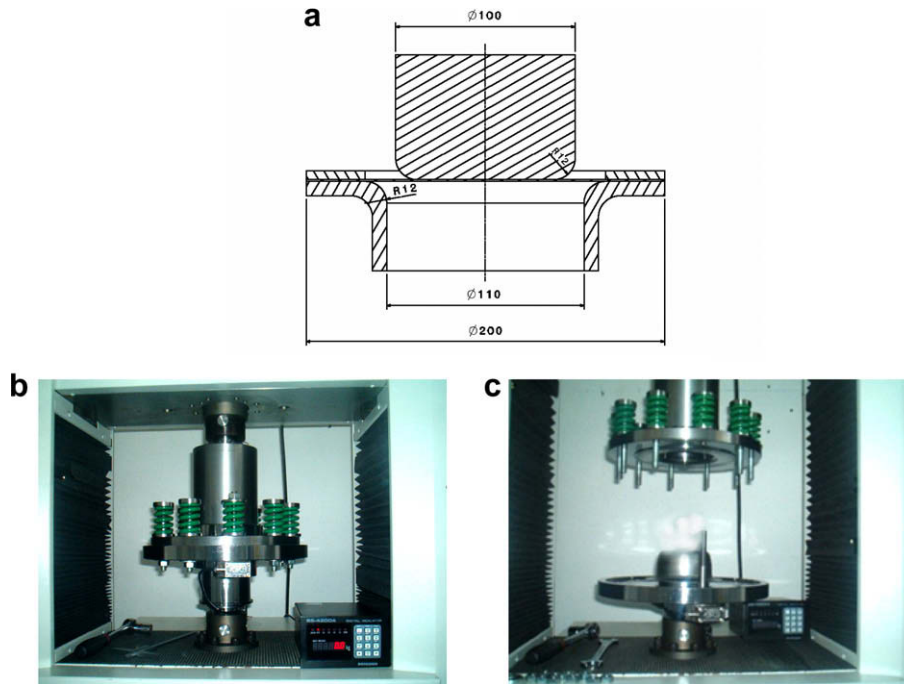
Sketch of the stamping tool (a) and images of the initial (b) and final (c) stages of the stamping operation.
